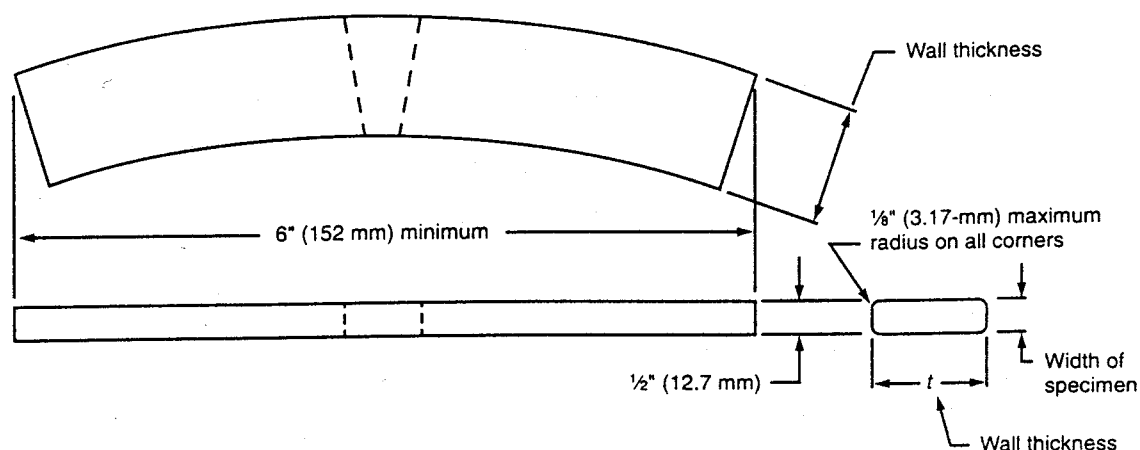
Root-Bend- and Face-Bend-Test Specimens—Groove Welds
